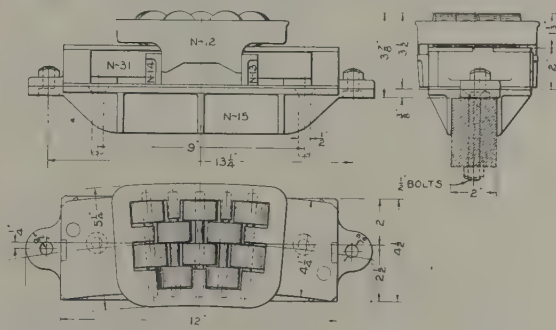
Creco Roller Side Bearing No. 7-A for Six-Wheel Passenger Train Car Trucks.
